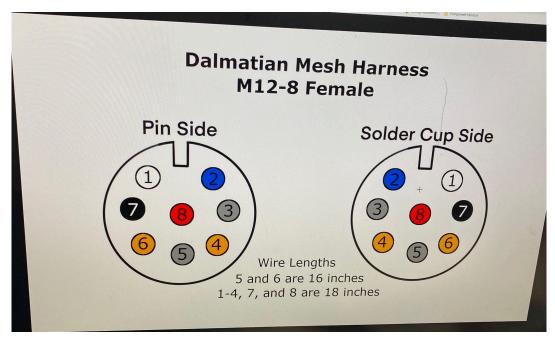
Soldering Example, Custom Dalmation Harness diagram
